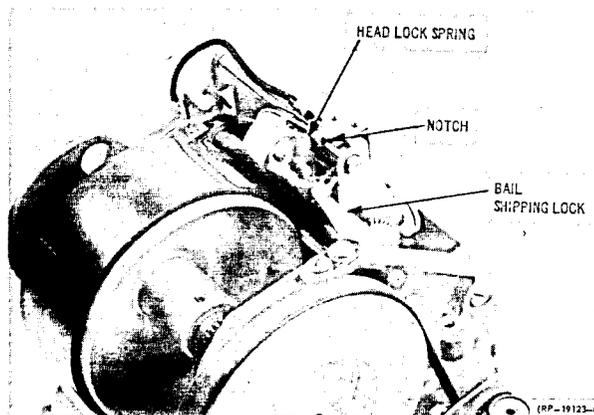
BAIL SHIPPING LOCK AND HEAD LOCK SPRING IN LOCKED POSITION.
